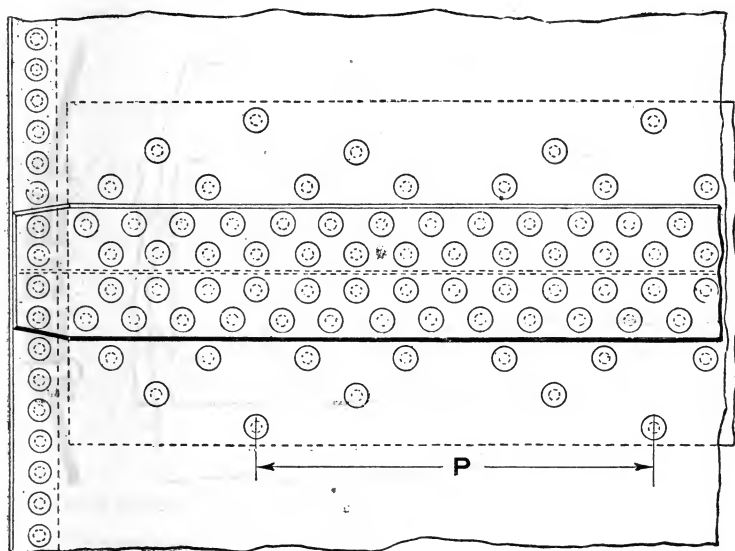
,872.—Example of butt and double strap joint, quintuple riveted.
